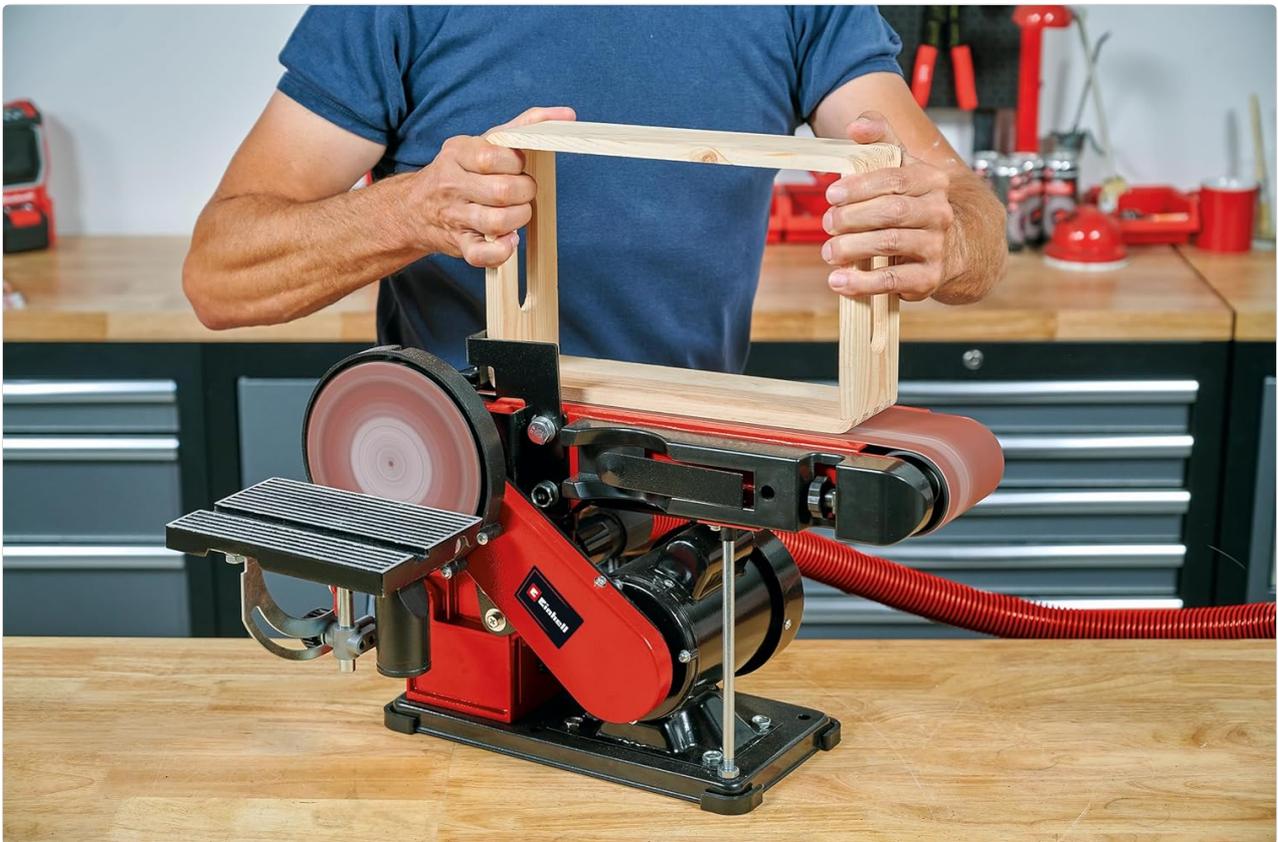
The Einhell TC-US 380 Disc and Belt Sander in operation, demonstrating the belt sander being used to smooth a wooden frame. A dust extraction hose is connected to the machine.
